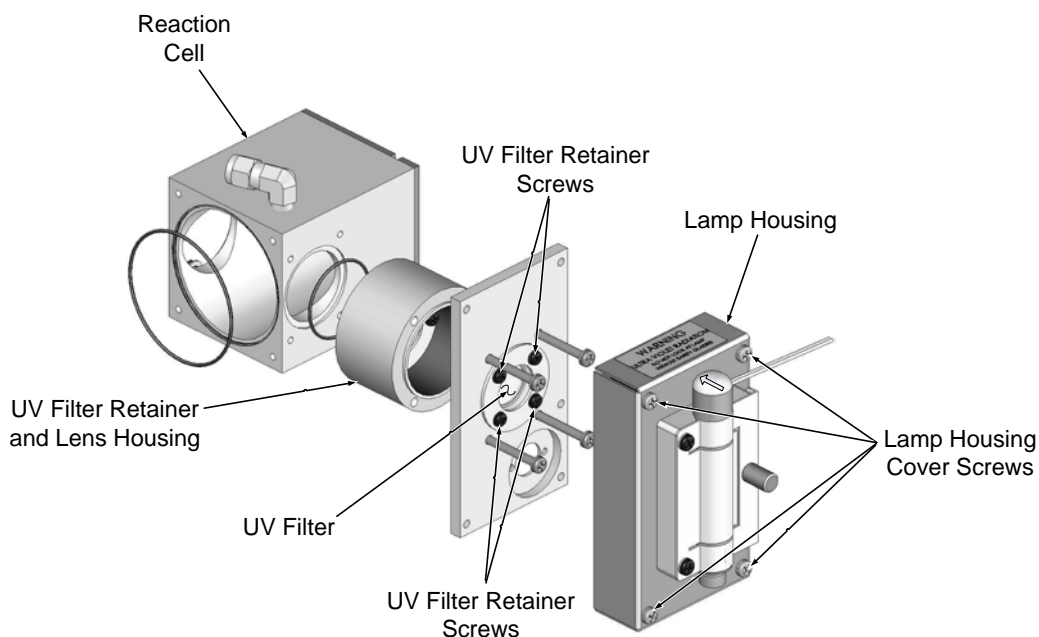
Disassembling the Sample Chamber/UV Source Assembly
